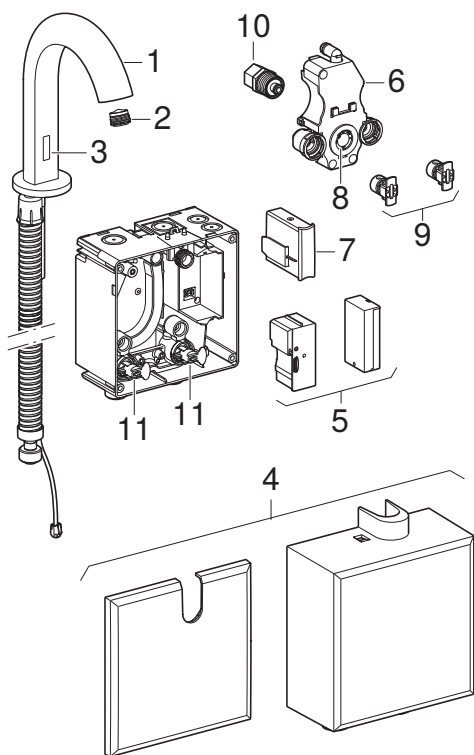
Chicago Faucets lavatory faucets, deck-mounted
